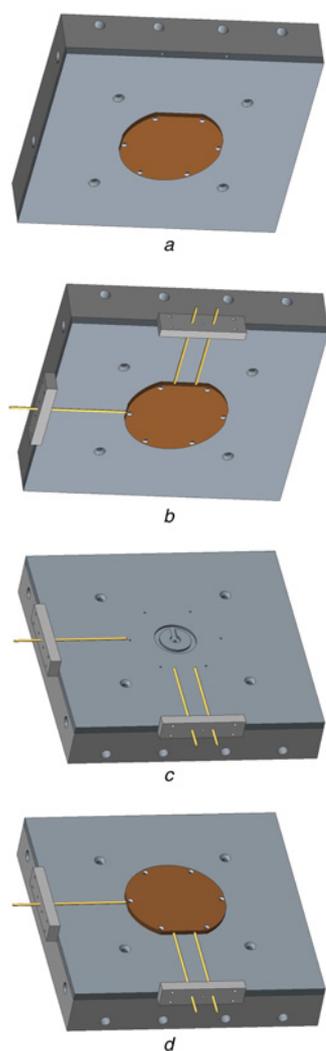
Mounting of top mould insert on upper aluminium plate (Fig. 4*a*); three contacts of lead screws with flat edges of top mould insert to define its location (Fig. 4*b*); mounting of alignment tools on lower aluminium plate to constrain location of complementary mould insert with respect to top mould insert (Fig. 4*c*); alignment of complementary mould insert with respect to top mould insert based on position of three lead screws (Fig. 4*d*)
